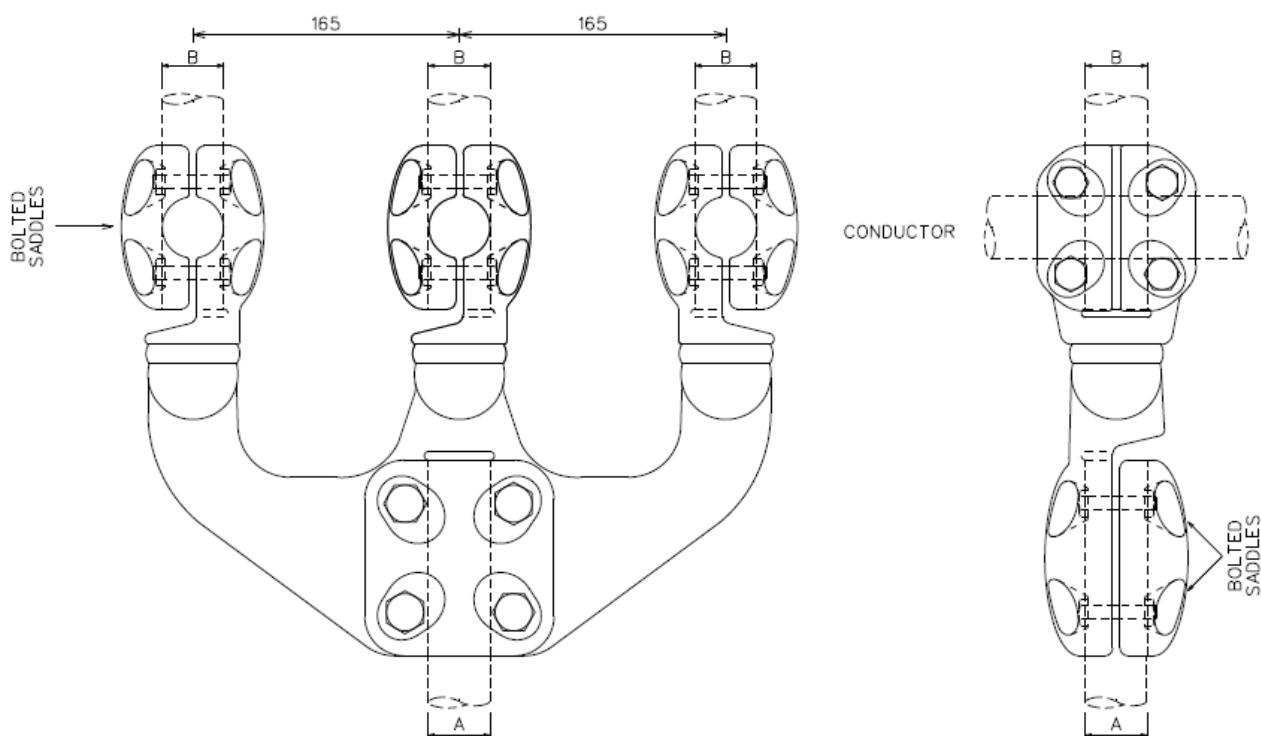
EY3 Type Bolted/Bolted Clamp for Stem Connection
